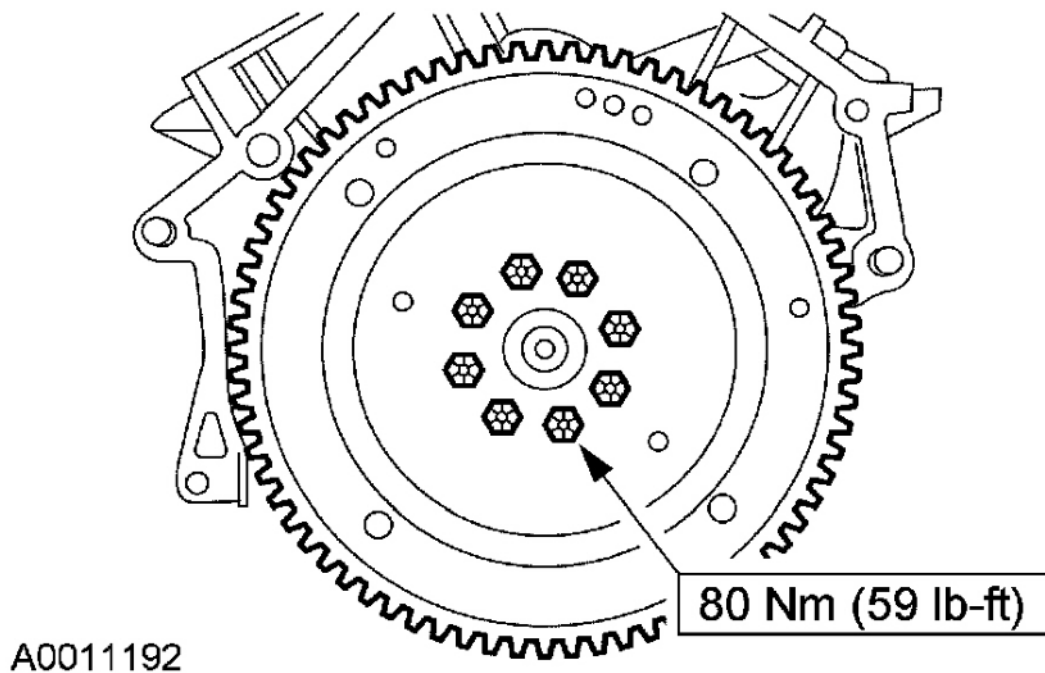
Tightening Flexplate Bolts - With Torque Specification
